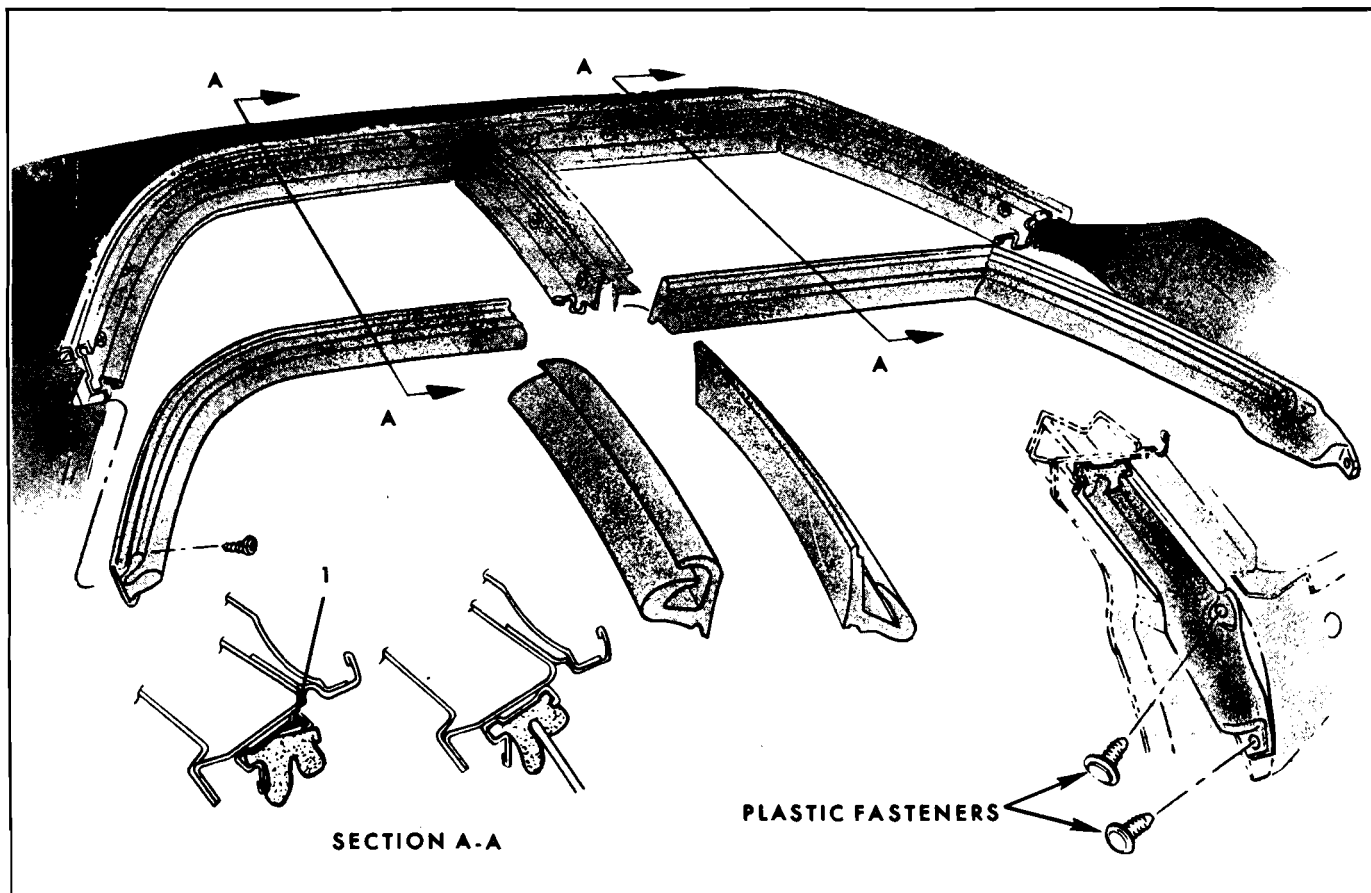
Side Roof Rail and Center Pillar Weatherstrip
